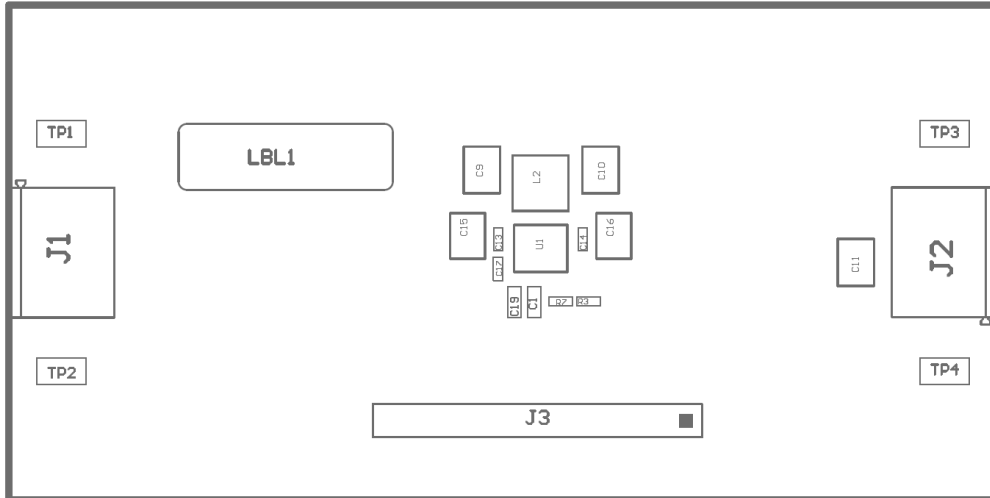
Top Assembly (Top View), LM63460EVM-2MHZ and LM64460EVM-2MHZ
